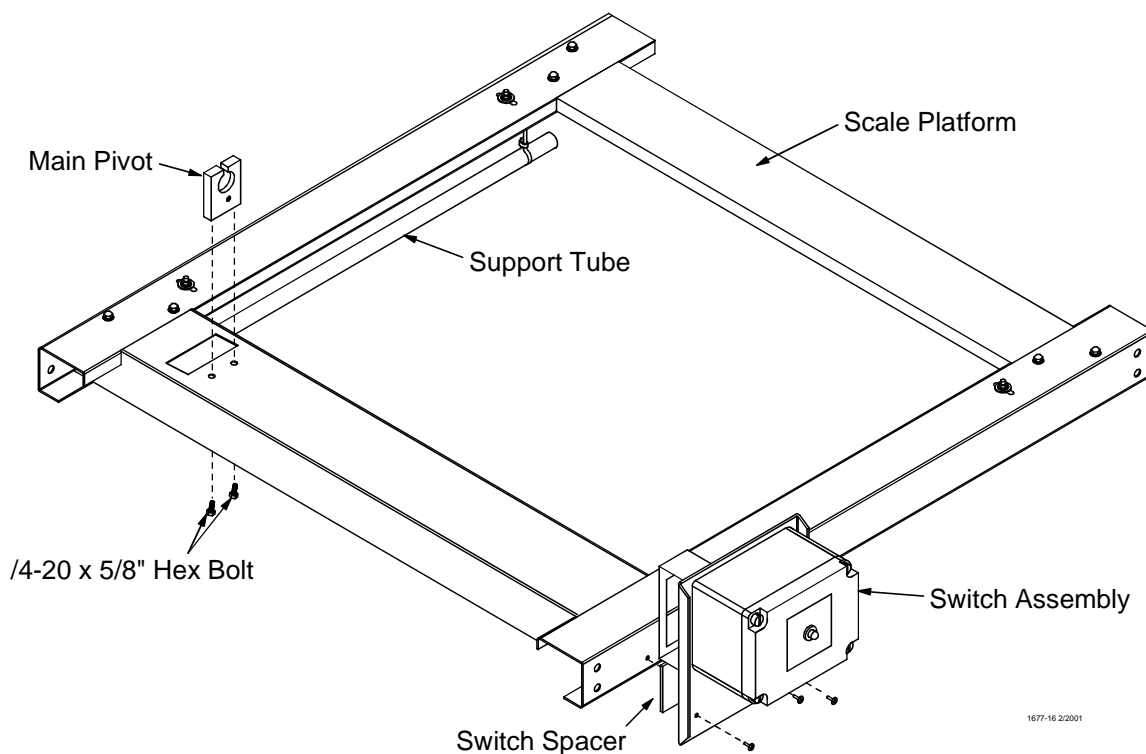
Assembling the Main Pivot and Switch Assembly to the Scale Platform
